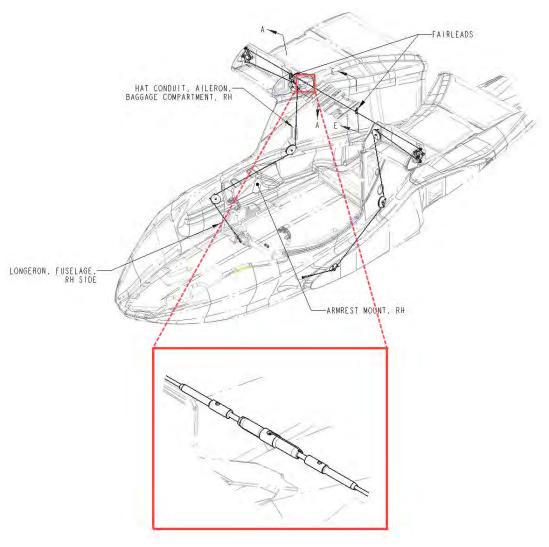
LOCATION OF UPPER ROLL CABLE TURNBUCKLE
